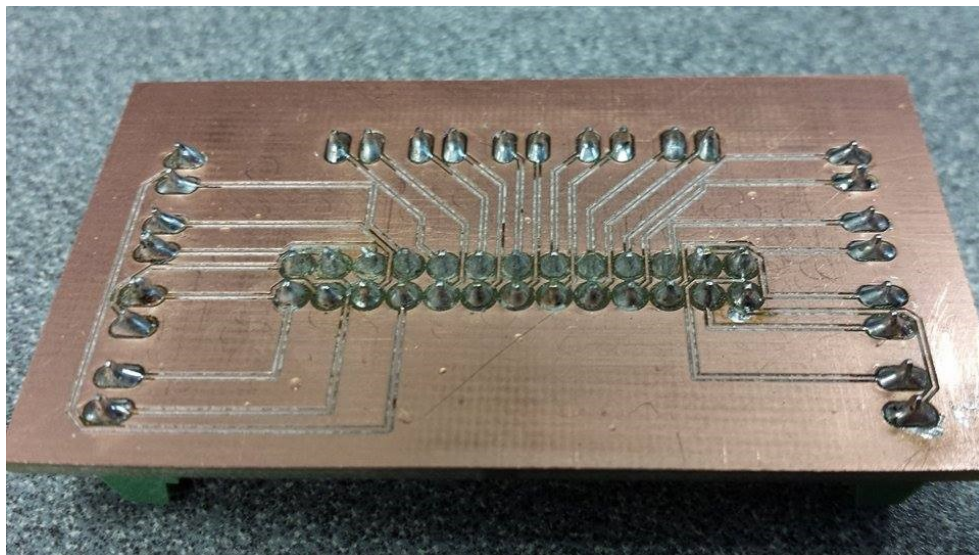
The 26 pin Breakout Board for The Sensoray 826 I/O card
